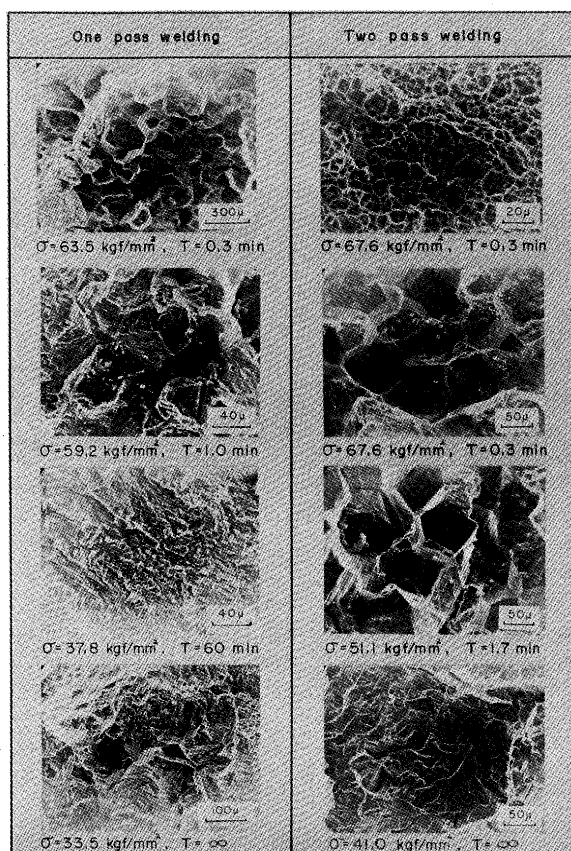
Typical fractographs of Implant test (Underwater welding)
